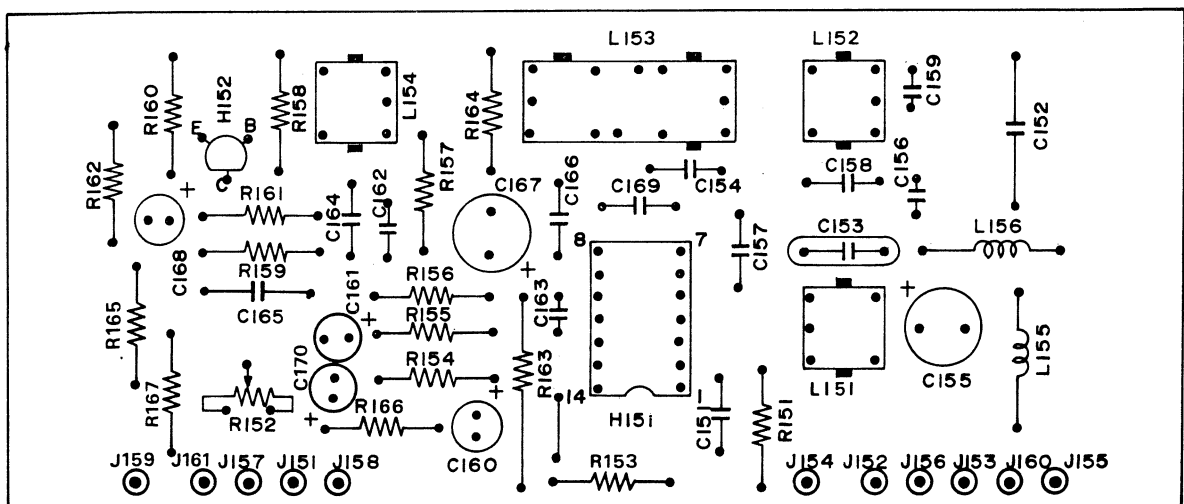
AM Tuner Unit Assembly P150 Component Locations
